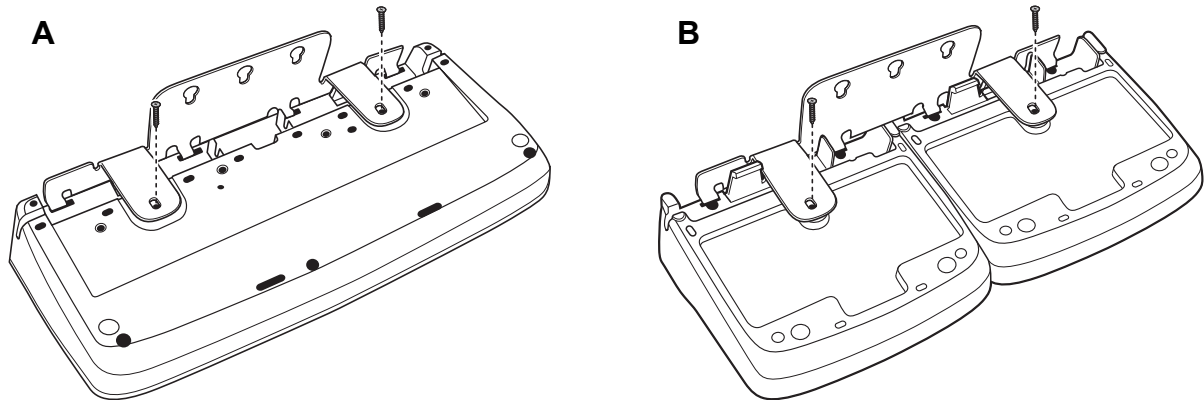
Insert Bracket into SAC5000-8000CR Cradle
